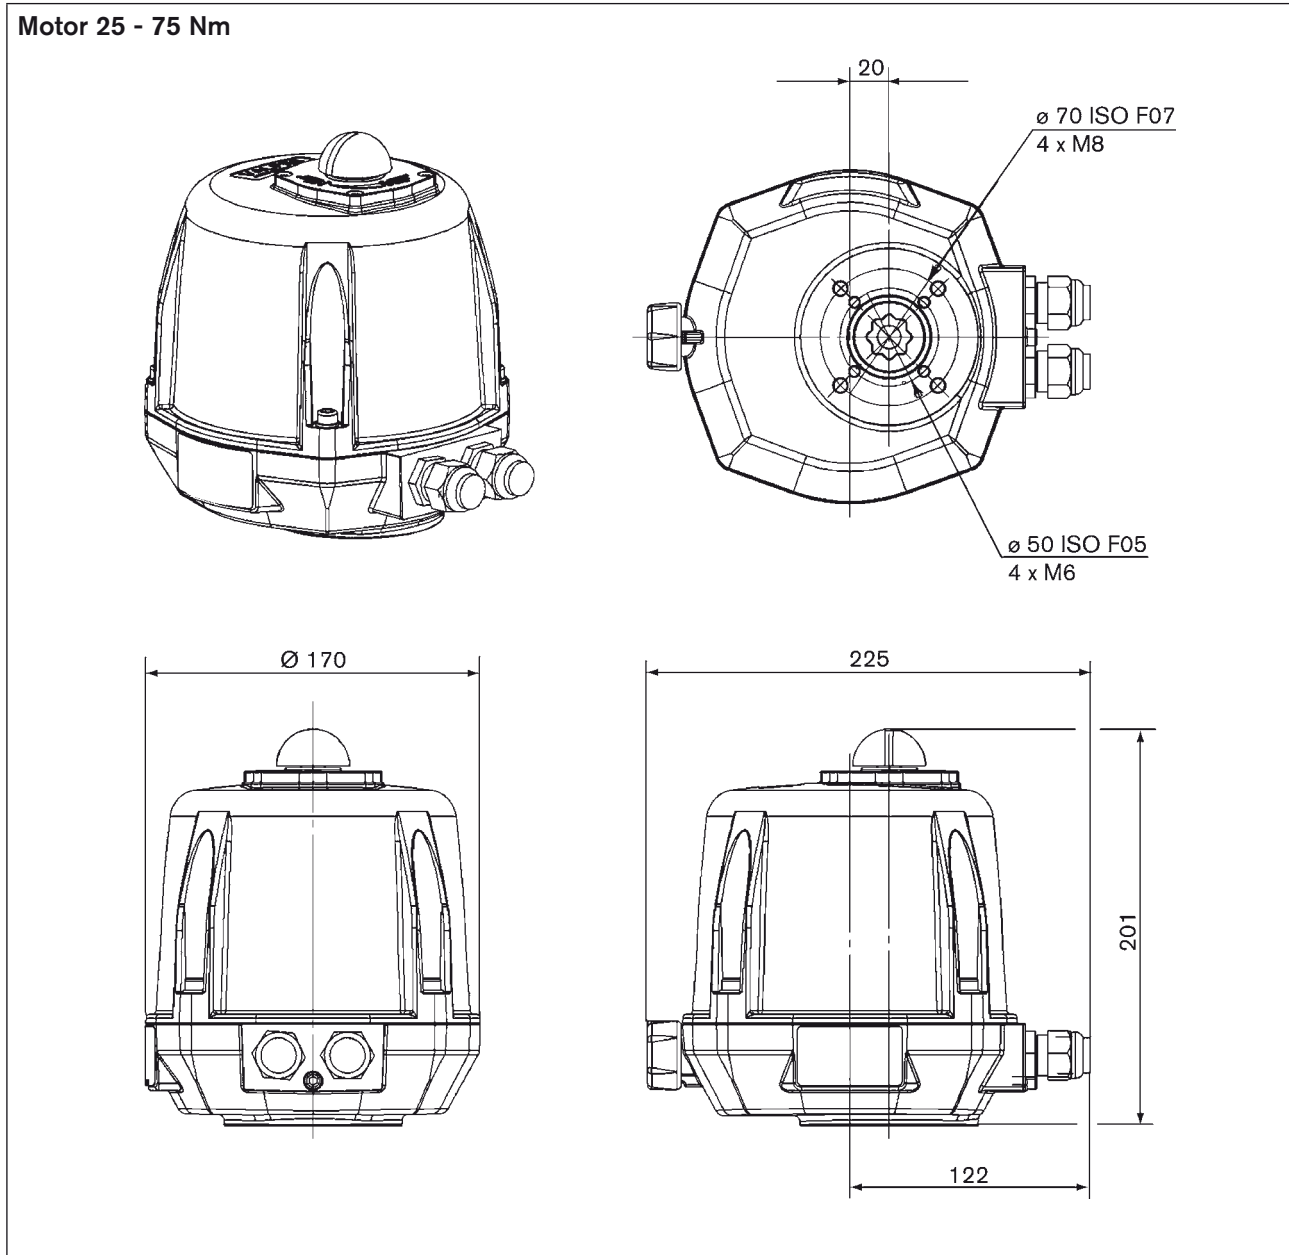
Dimensions Type 3005 with torque 25 - 75 Nm
